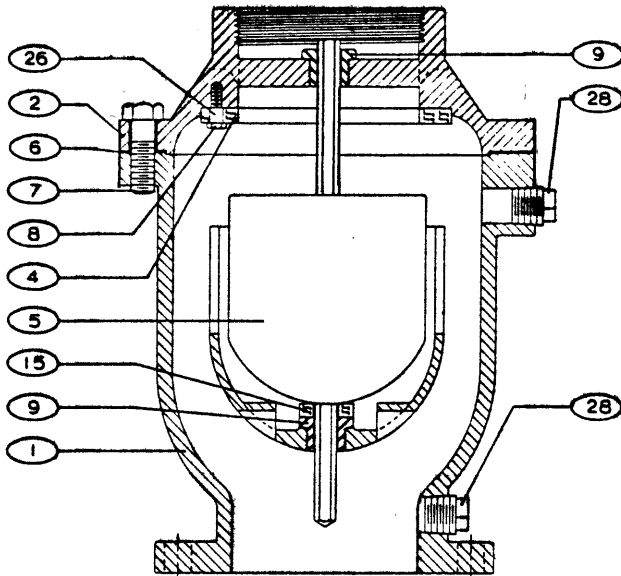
4"-16" WELL SERVICE AIR VALVE
